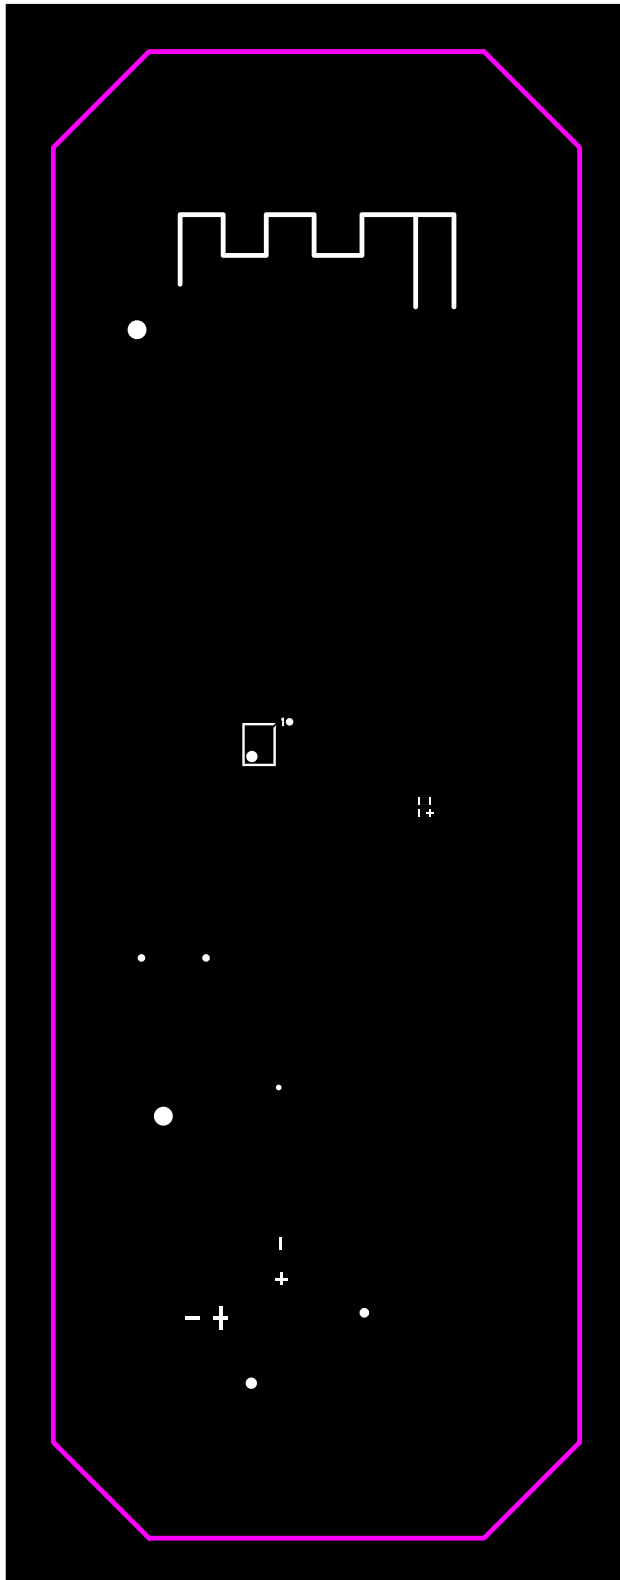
PCB Gerber Layer for the Top Solder Mask Layer
